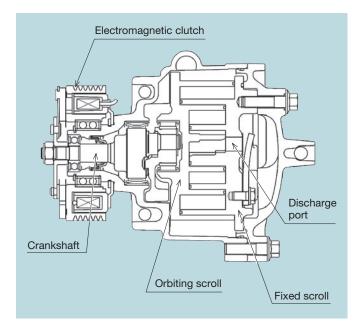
The newly developed scroll compressor for a car air-conditioner (QS90)
